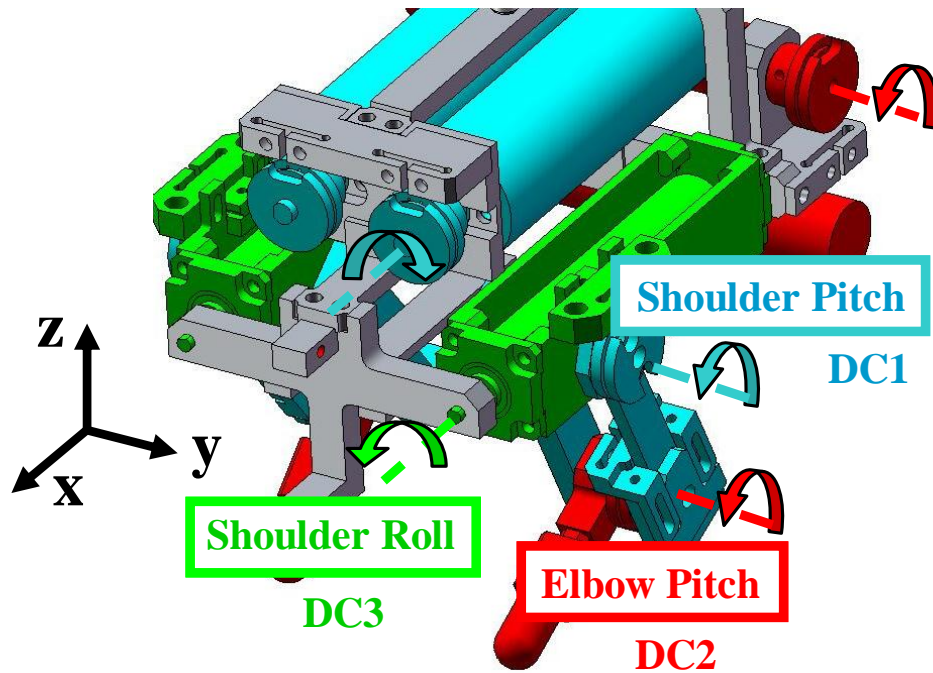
The mechanical design of the left arm. It consists of 3 DOFs: roll and pitch of the shoulder joint and pitch of the elbow joint. The three DC motors are assembled in the body via wire and outer-tube driving mechanism to actuate corresponding joints.
